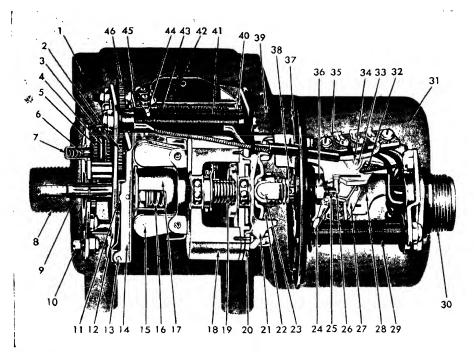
A phantom view of the turbo-governor. (1) Housing cover plate; (2) clutch gear; (3) counter-clockwise drive gear; (4) clutch disk; (5) clockwise drive gear; (6) clutch-disk shaft; (7) clutch spring; (8) threaded connector; (9) splined governor shaft; (10) clutch-lever adjusting screw; (11) thrust collar; (12) mounting bracket; (13) clutch-lever pivot; (14) clutch lever; (15) flyball weight; (16) governor spring; (17) spring barrel; (18) inertia rotor; (19) torque spring; (20) locking plate; (21) cam plate; (22) guide; (23) cam-roller assembly; (24) potentiometer wiper; (25) push rod; (26) cross-head; (27) wiper arm; (28) frame assembly; (29) potentiometer winding; (30) connector; (31) accelerator cover; (32) return spring; (33) fulcrum adjustment; (34) wiper-arm pivot; (35) terminal block; (36) nut on governor shaft; (37) bearing plate; (38) governor shaft; (39) governor housing; (40) declutching extension arm; (41) potentiometer winding; (42) collector bar; (43) lead screw; (44) potentiometer wiper; (45) lead-screw nut; (46) lead-screw drive gear. (Courtesy Minneapolis-Honeywell Regulator Co.)
